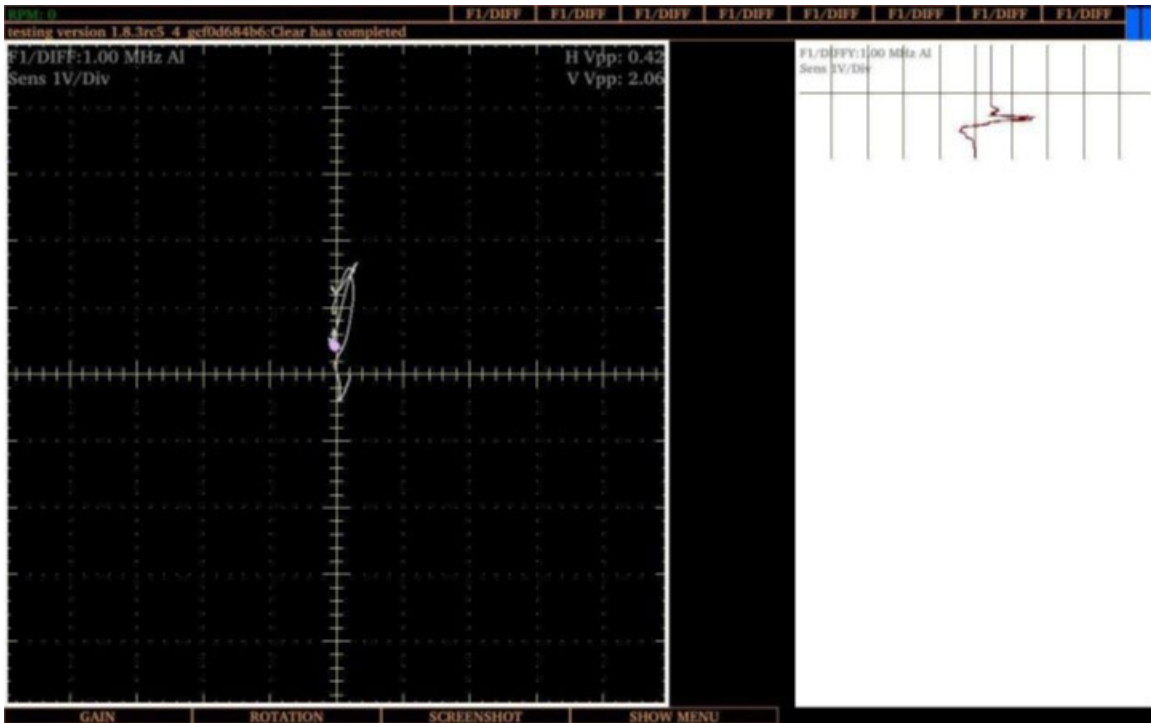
ET indication of defect at Location C in fillet weld test panel MGL-10
